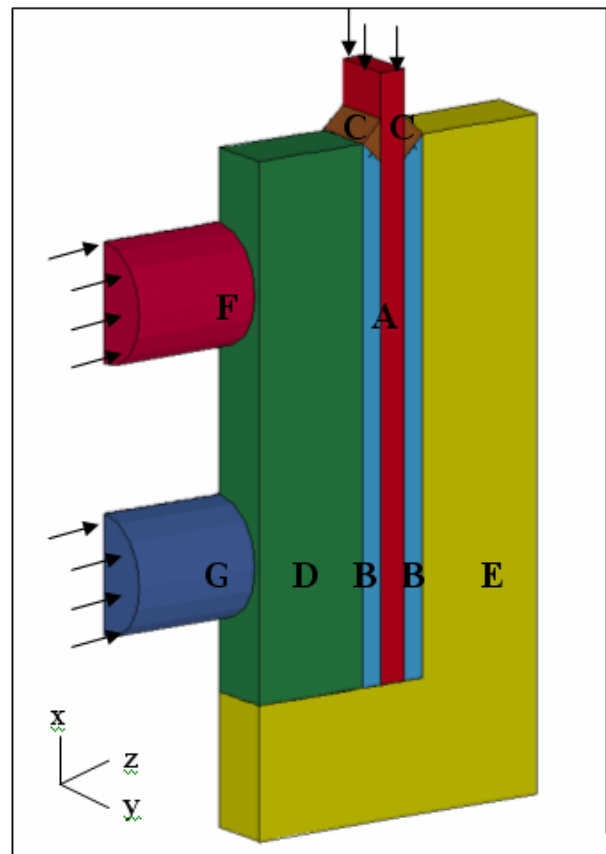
Reverse chamfer design model parts and loading conditions for 2 mm thick specimen
